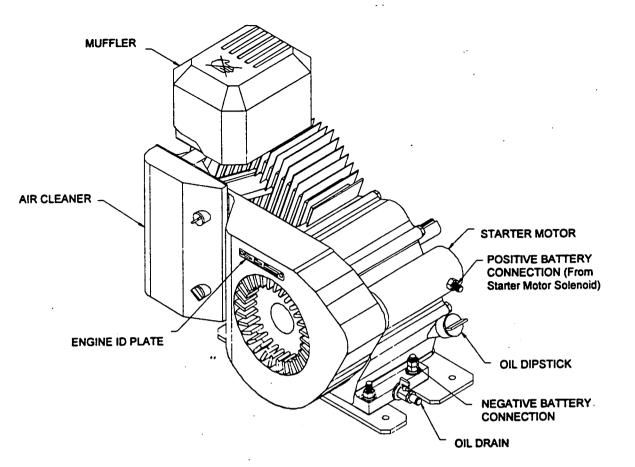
3 kW Generator Set Component Locations - Starter Side
